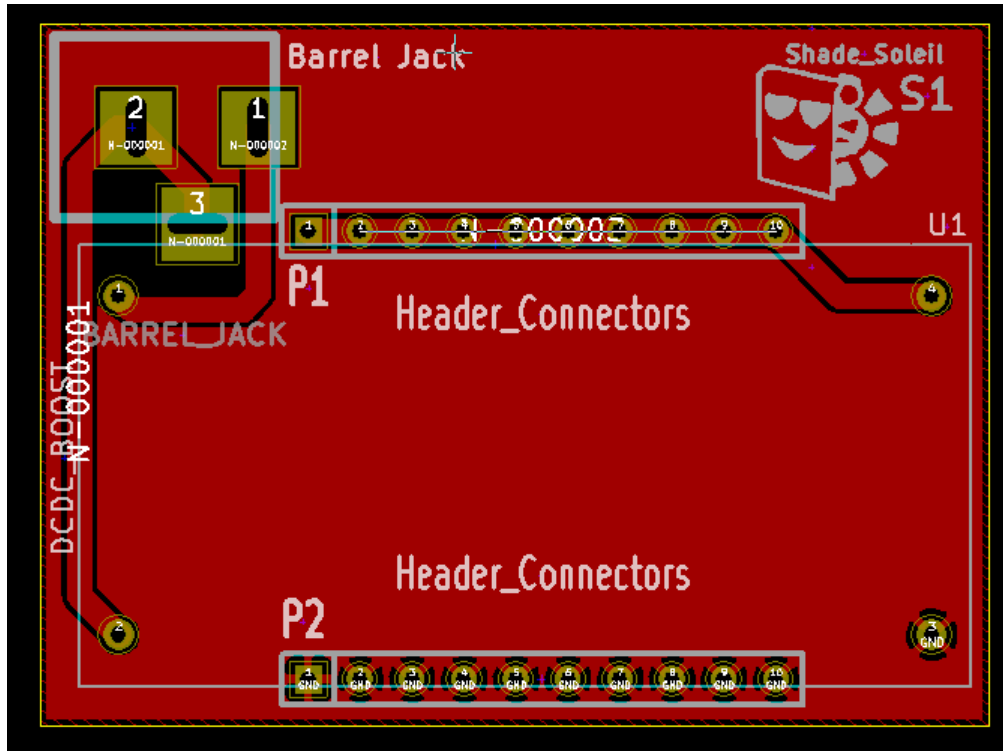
Top PCB layout for the PCB in Sector 1. There are no bottom traces on this PCB. This board is 34.5x46.5 mm (1.36"x1.83").
